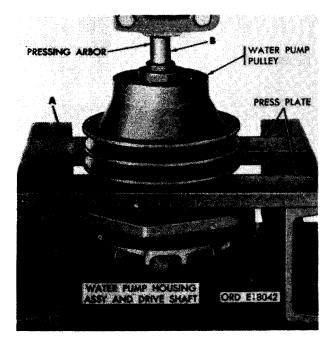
REMOVING WATER PUMP HOUSING AND DRIVE SHAFT FROM WATER PUMP PULLEY. (5) Figure 121. (A) Mount water pump housing assembly in an arbor press. Support the assembly under impeller with two press plates. (B) Remove water pump housing assembly and drive shaft from impeller.
